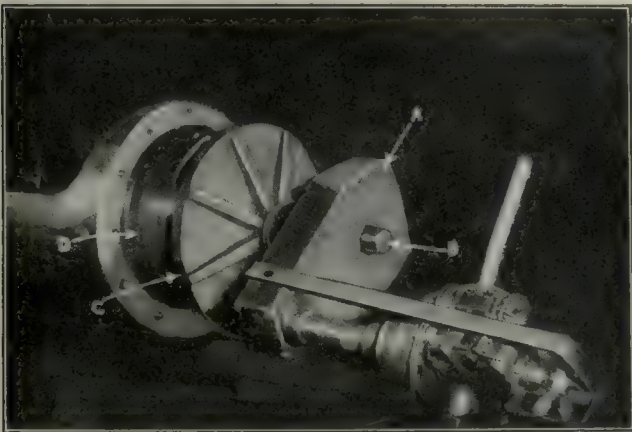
PRESSING-IN A CYLINDER BUSHING
